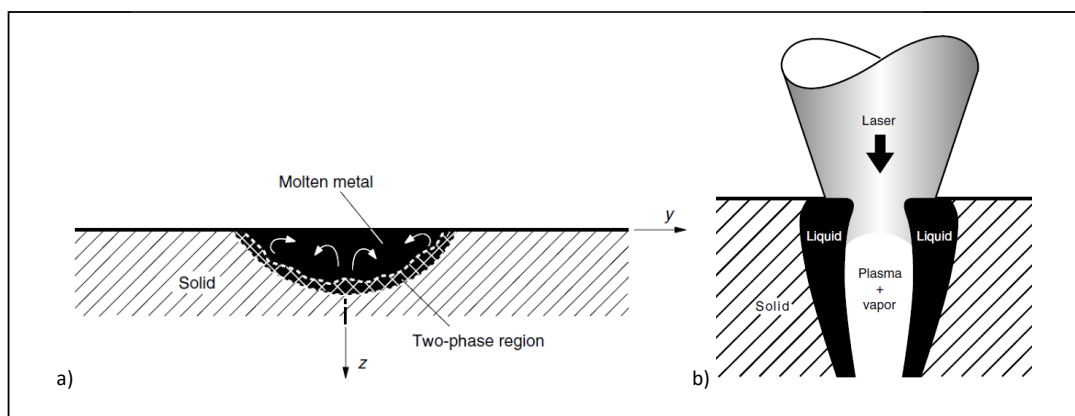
(a) Schematic representation of conduction and (b) keyhole mode welding. [65].
